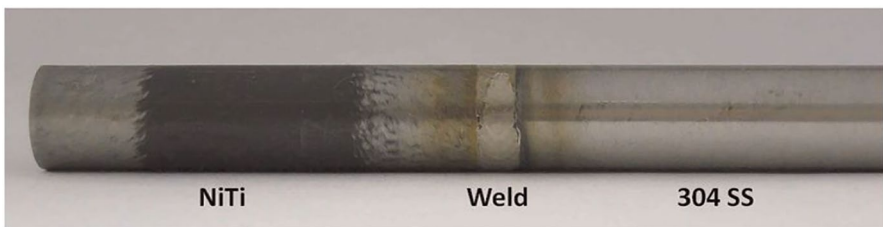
Joint of NiTi and SS after TIG welding [42]
